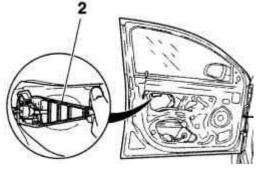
Removing oporno1 staples outside of the door knob assembly
